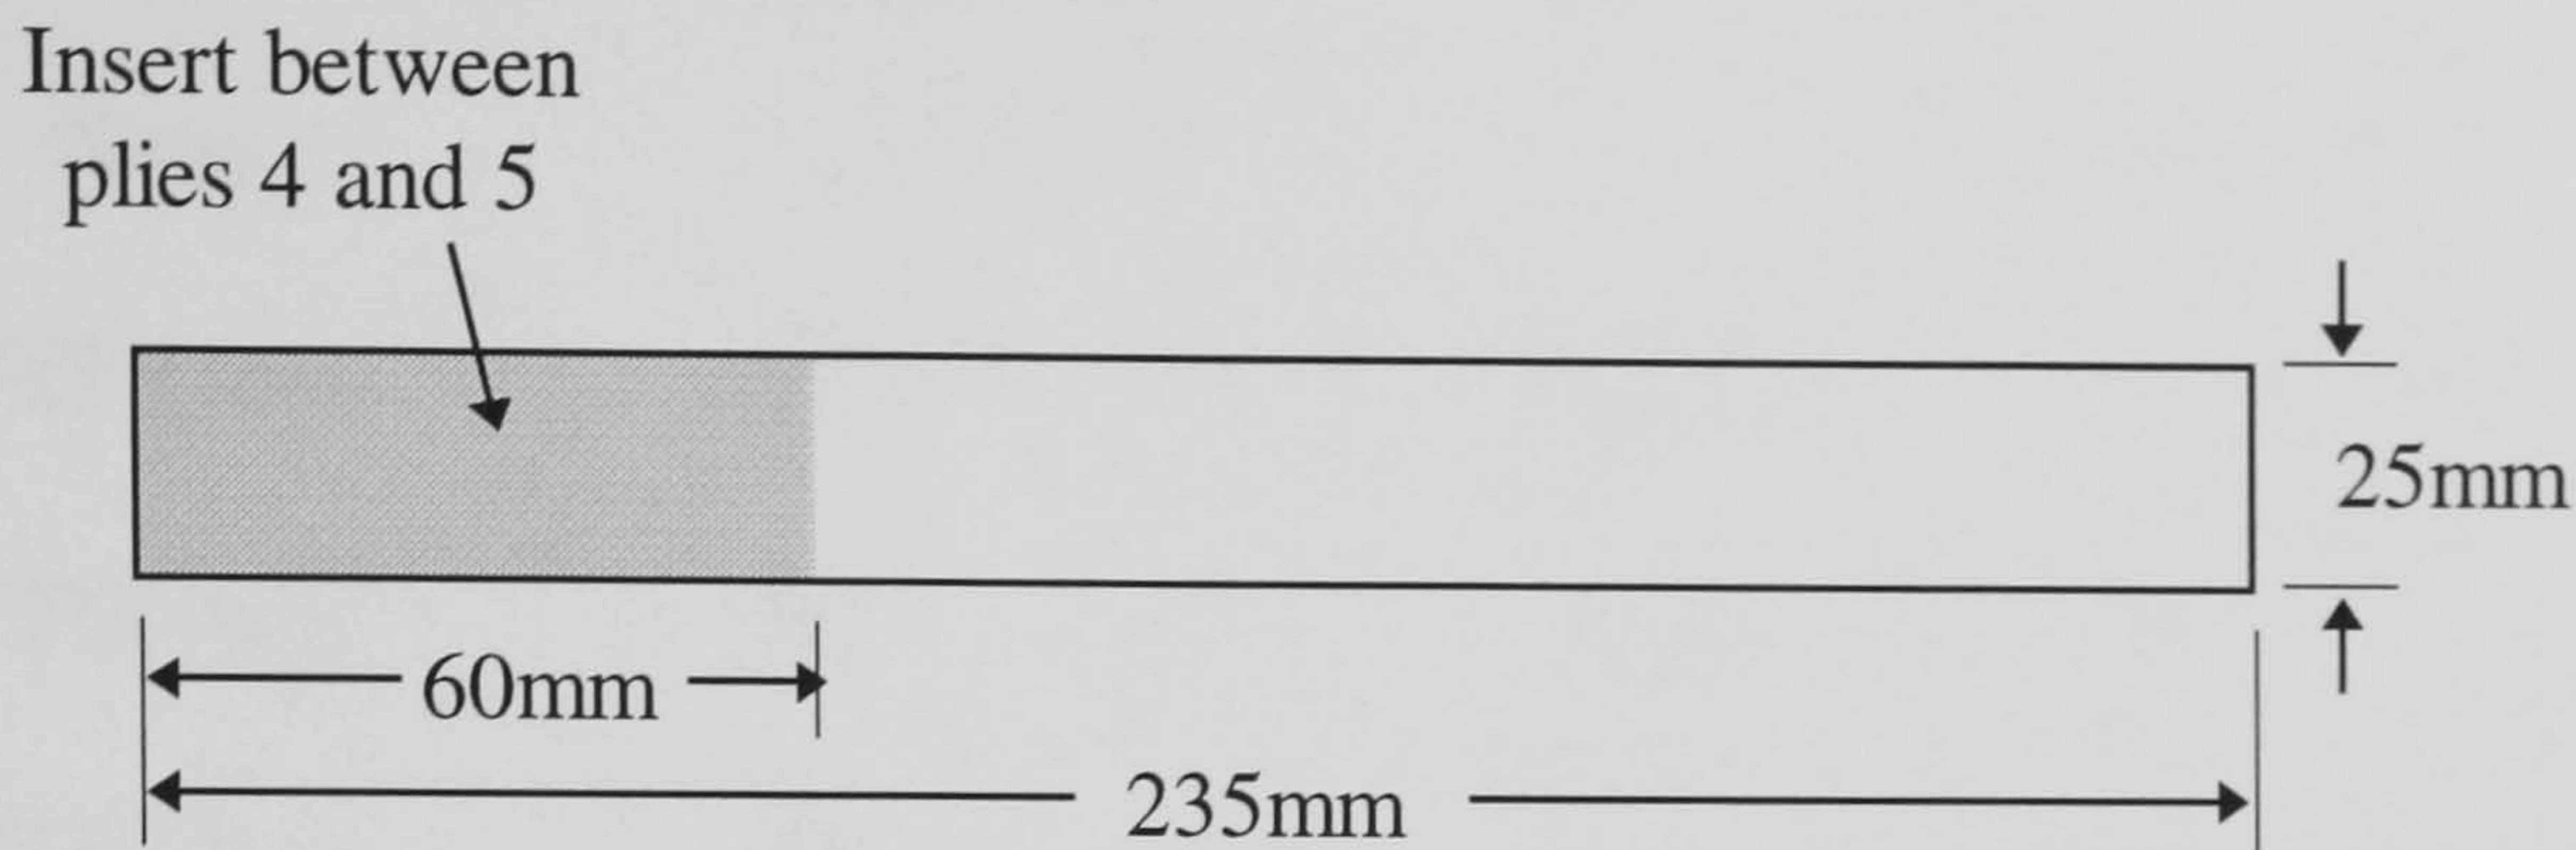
Dimensions of specimens for modified double cantilever bend test.
